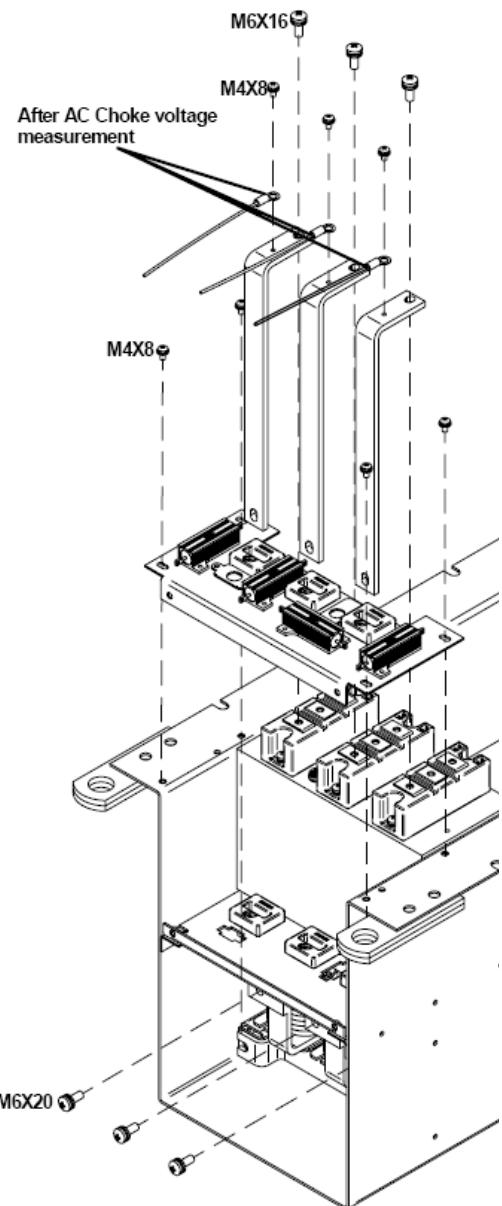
Assembly of the soft charge and quick-discharge resistors.
